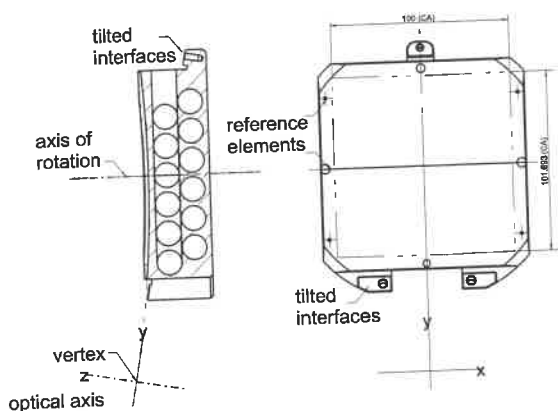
Mechanical design drawing of the primary freeform mirror with reference elements for the metrology and tilted interface flats for the system assembly.
